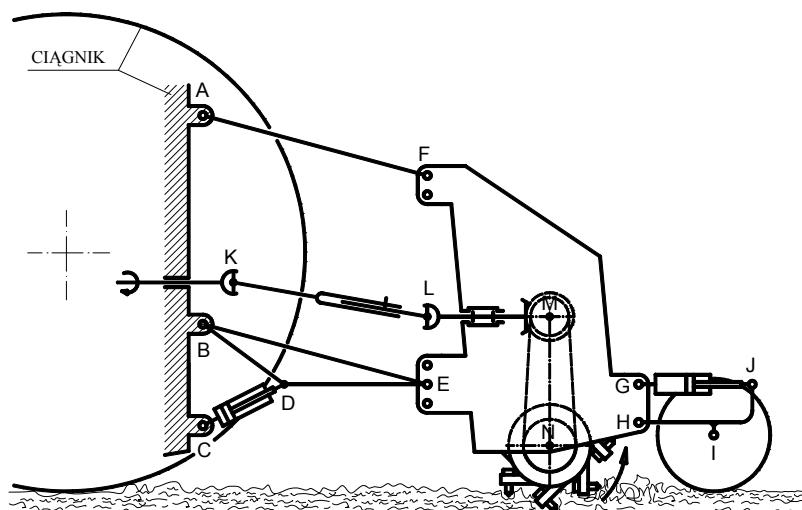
The drawing of the crushing machine MJS-2.5 DT at work: A, B, C, D, E, F – mechanism for lifting the milling drum, G, H, I, J – mechanism for lifting the rear drum, K, L, M, N – mechanism for driving the milling drum
